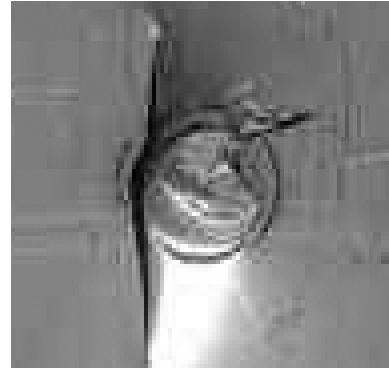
Fatigue crack on the outer surface of spot welded lap joint
